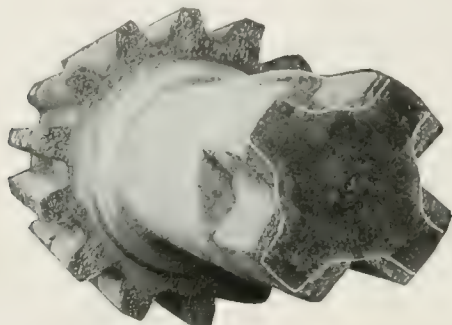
A WORN BLOOMING MILL PINION REPAIRED BY THE ARC WELDING PROCESS
